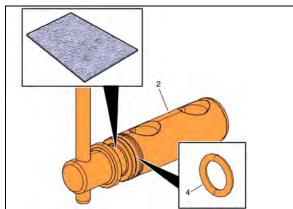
INSPECT THE O-RING (4) IN THE SPINDLE
